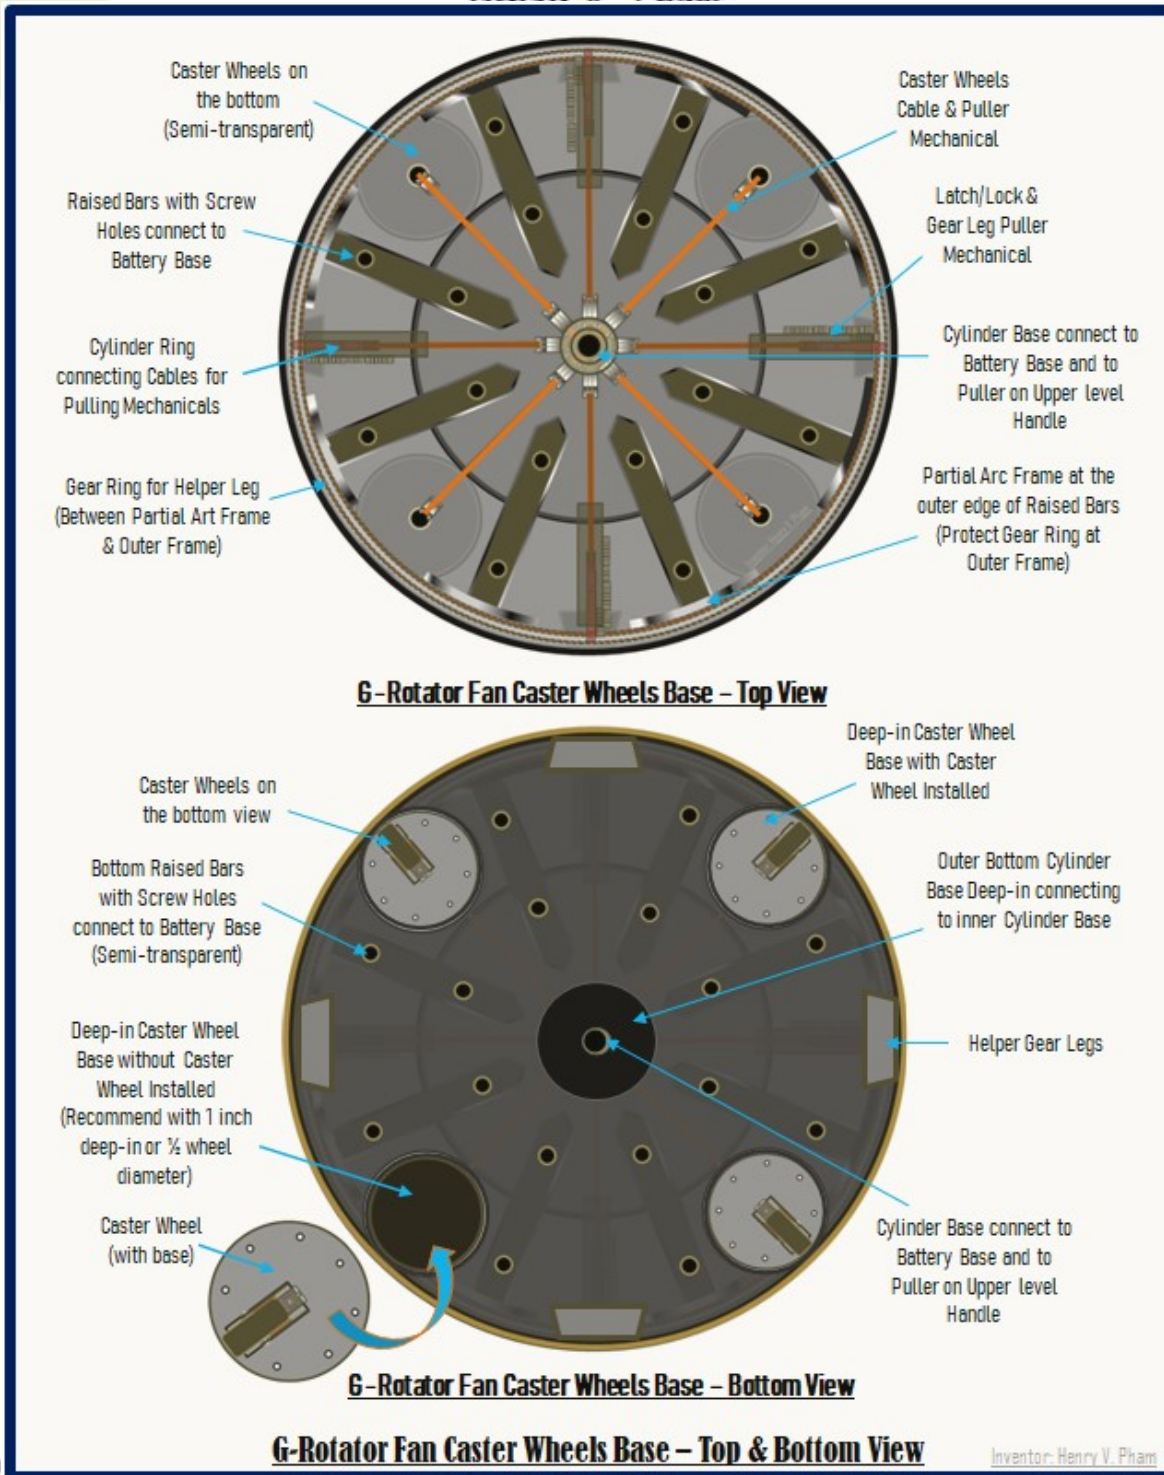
360° Stand G-Rotator Fan - Caster Wheels & Gear Helper Legs Mechanicals Layout
